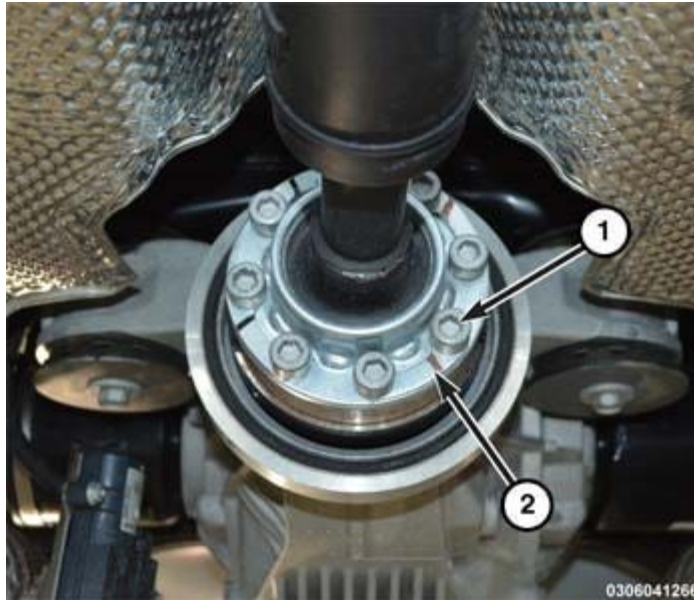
Drive Shaft To Axle Flange Bolts & Washers
